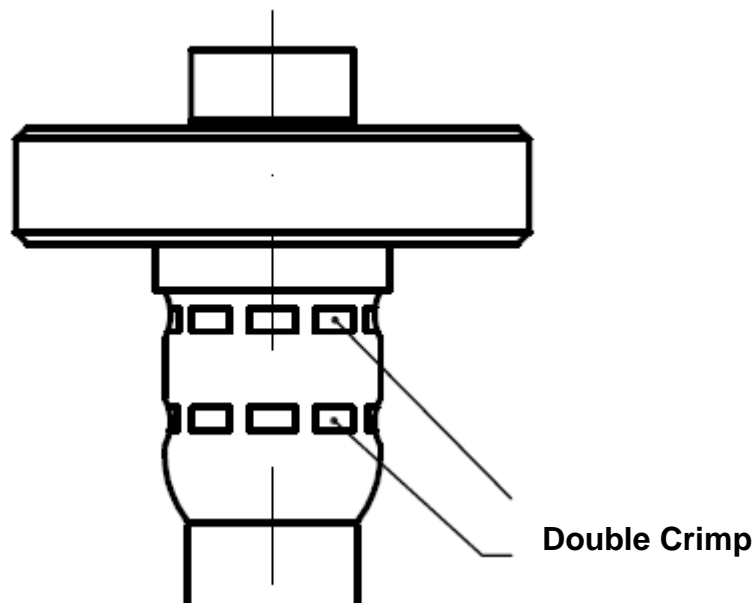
Re-design of contact assembly piece, to allow for a double crimp of copper shell.
